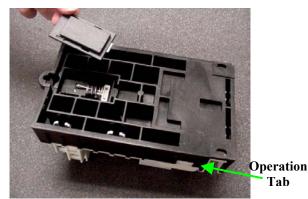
Caution: Once latch cover has been installed, it may not be removed. Ensure latch is properly installed prior to installing the latch cover.
